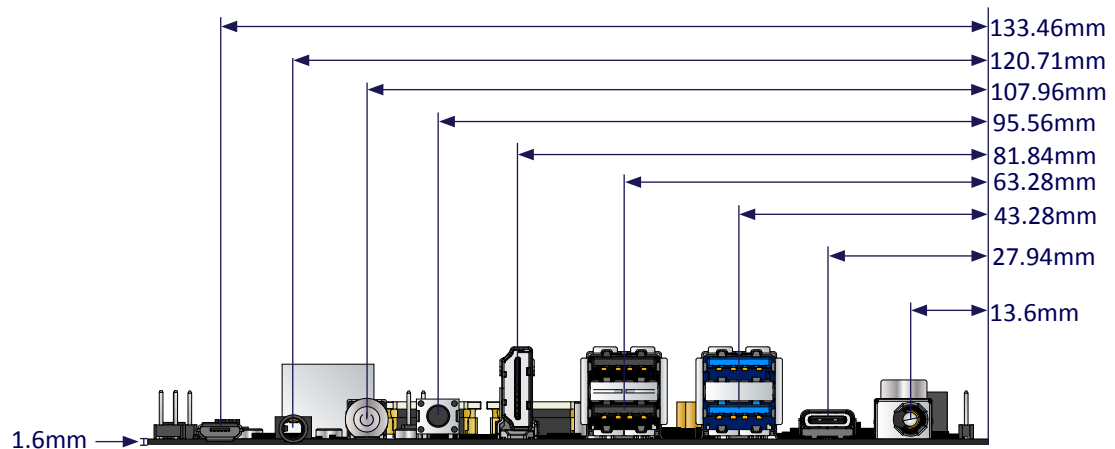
External I/O dimensions of the VIA AI Transforma Model 1 board (front coastline I/O)
